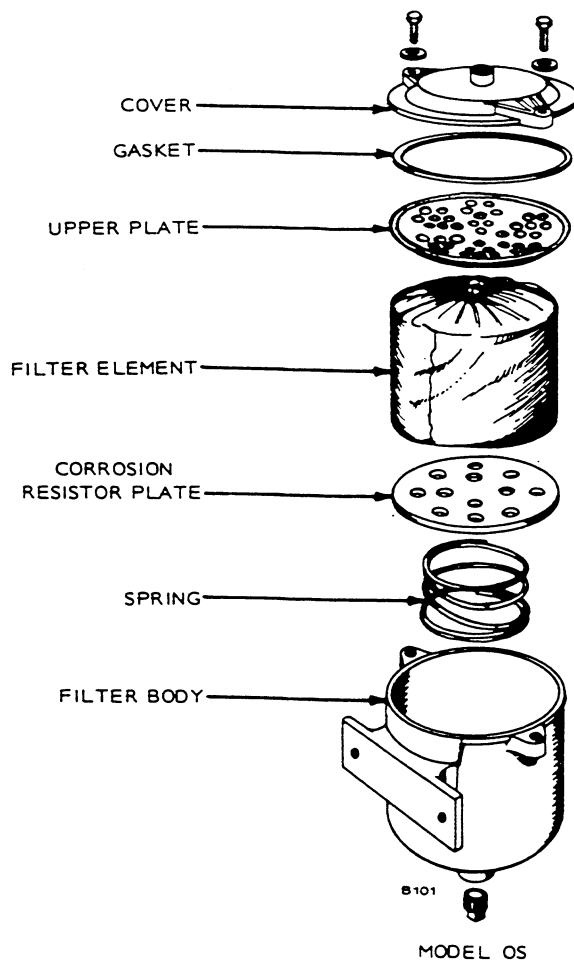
CHANGING CORROSION RESISTOR ELEMENT AND PLATE
